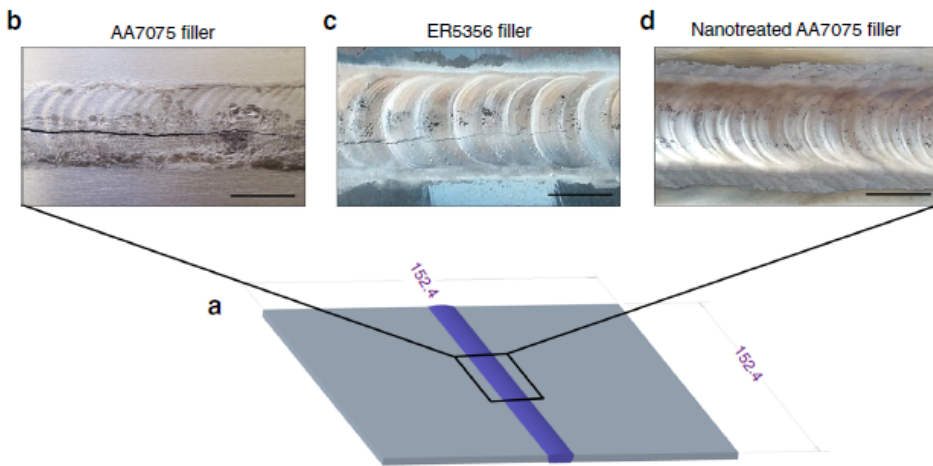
Weld appearance after Gas Tungsten Arc Welding of two 7075 Al-alloy sheets. a: Dimensions of the two 7075 Al plates welded together. b and c: Hot cracks formed during the welding using, respectively, 7075 and 5356 Al alloy as fillers. d: Bead melting zone of the 7075TiC weld, showing no macroscopic signs of cracking. The scale bar in all images is 10 mm. From [70].
